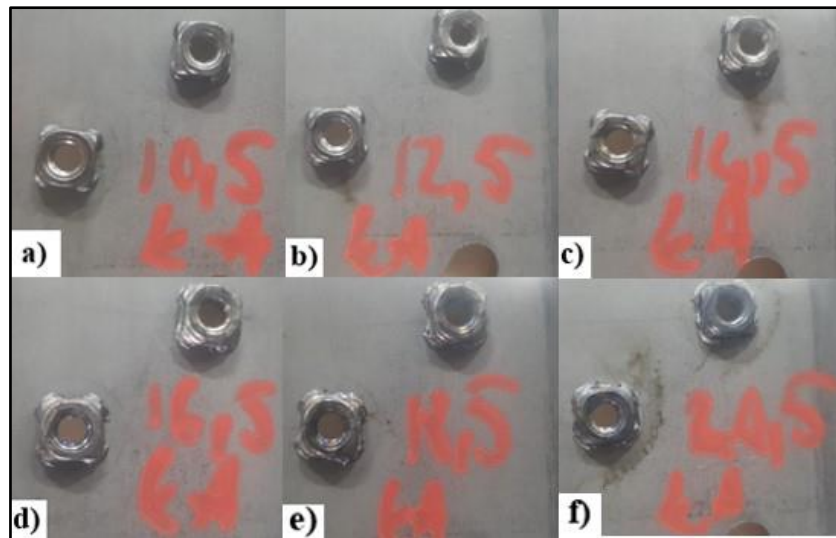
Images of test specimens after projection weld operation carried out at different weld currents: a) 10.5kA, b) 12.5 kA, c) 14.5 kA, d) 16.5 kA, e) 18.5 kA and f) 20.5 kA
